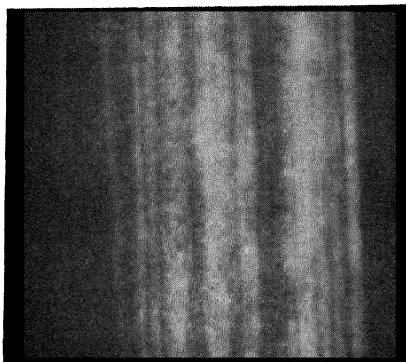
Radiograph of rolled sheet steel containing slag inclusions.
